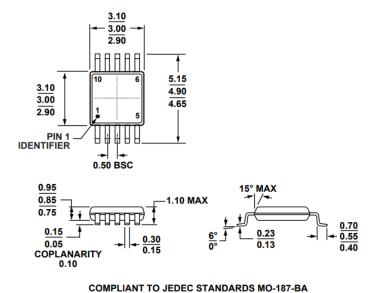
10-Lead Mini Small Outline Package [MSOP] Narrow Body (RM-10) Dimensions Shown in millimeters and (inches)
